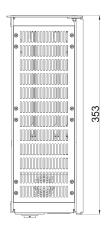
Dimensional drawing ECH 242 – 2 channel MMS crate
